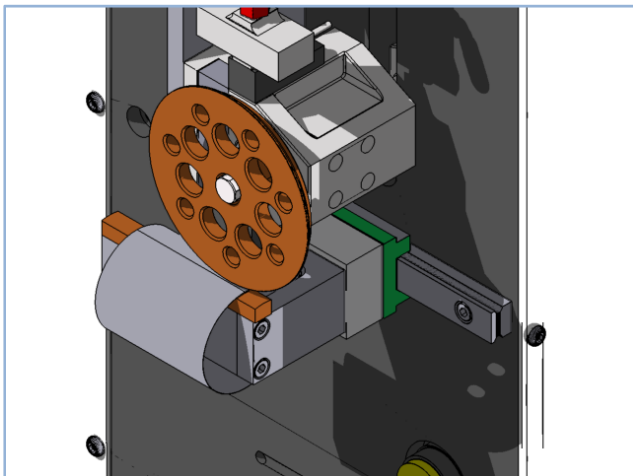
Internal Resistance Seam Weld Configuration
